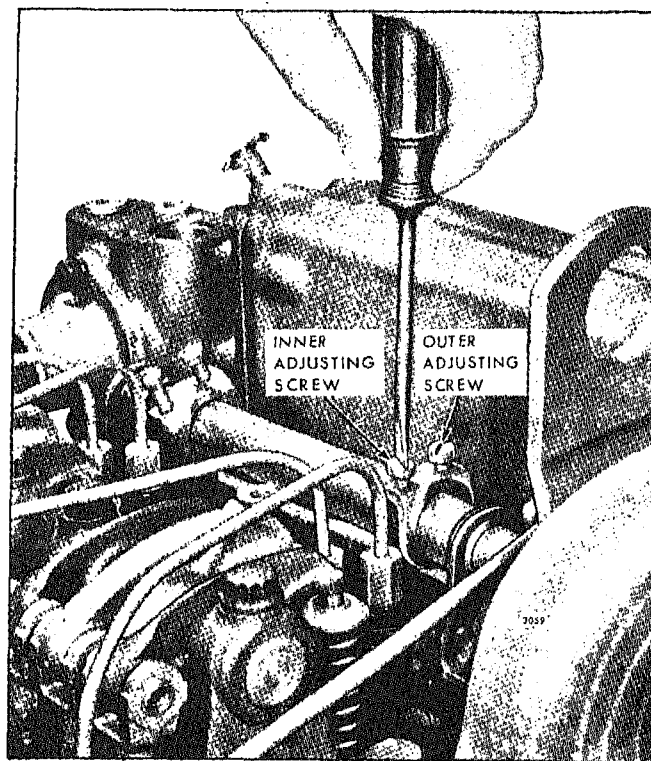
Adjusting Height of Rack Control Lever Adjusting Screws
